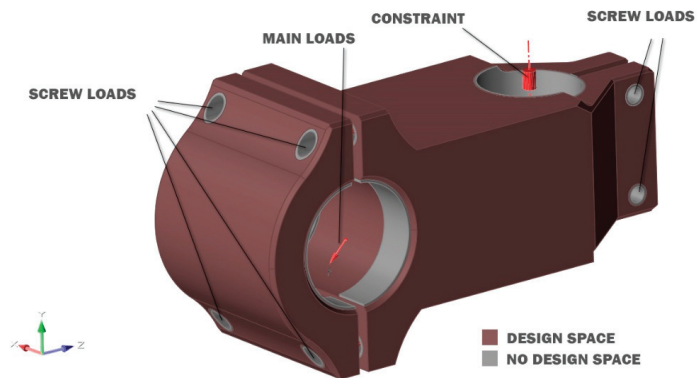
Definition of loads and constraints, as well as design and non-design spaces in the Inspire™ tool for the modified stem geometry.
